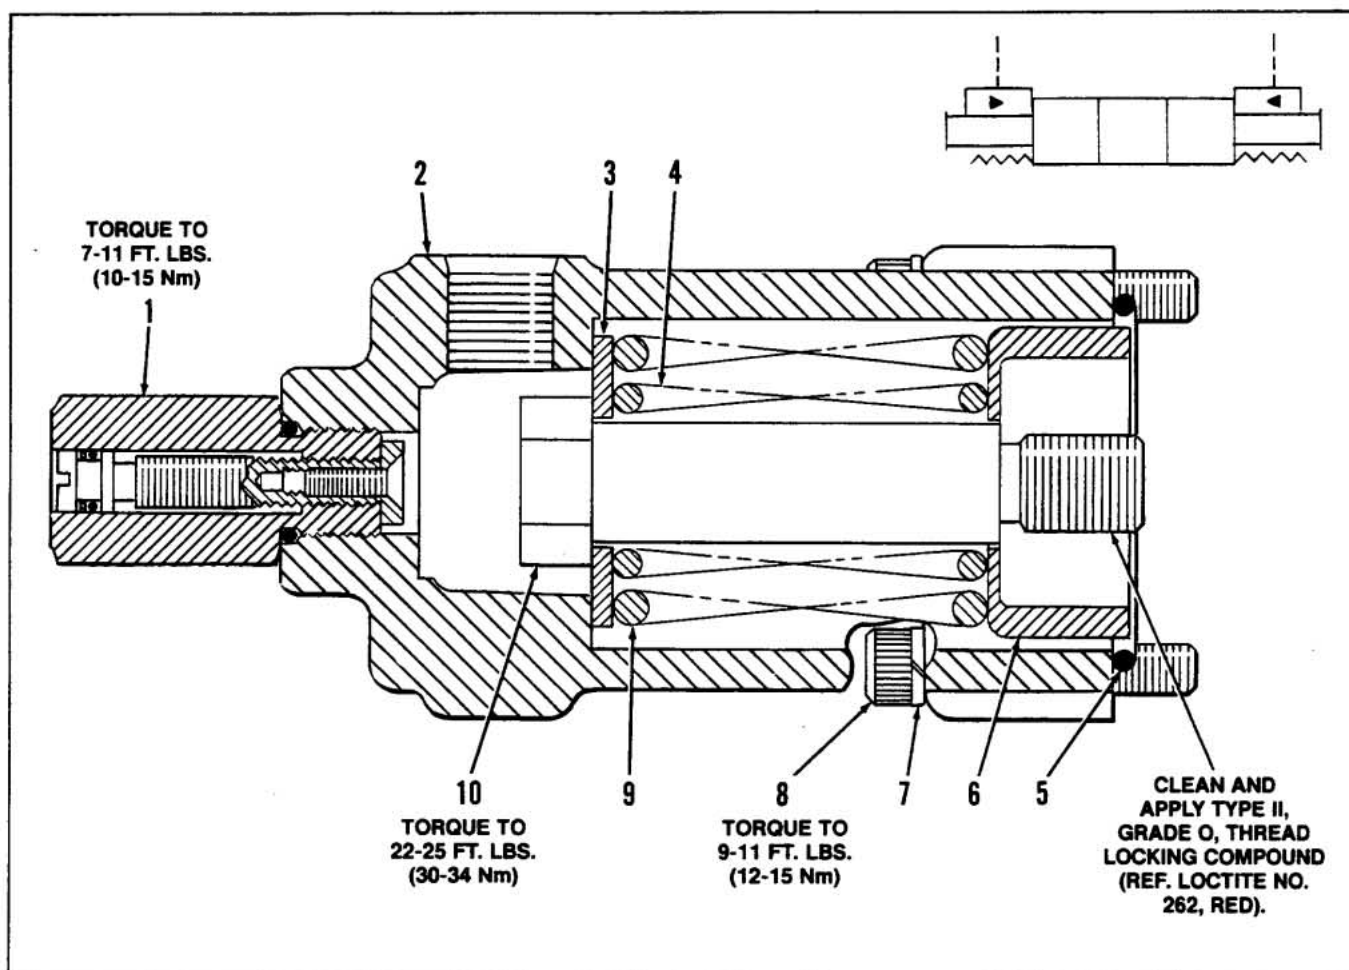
Hydraulic Remote Positioner with Manual Override ("B" Port End)
